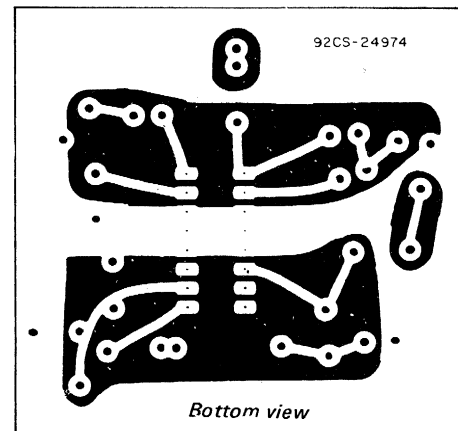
Printed-circuit board (actual size) containing the test circuit, shown in Fig. 3, for the CA3131EM.
